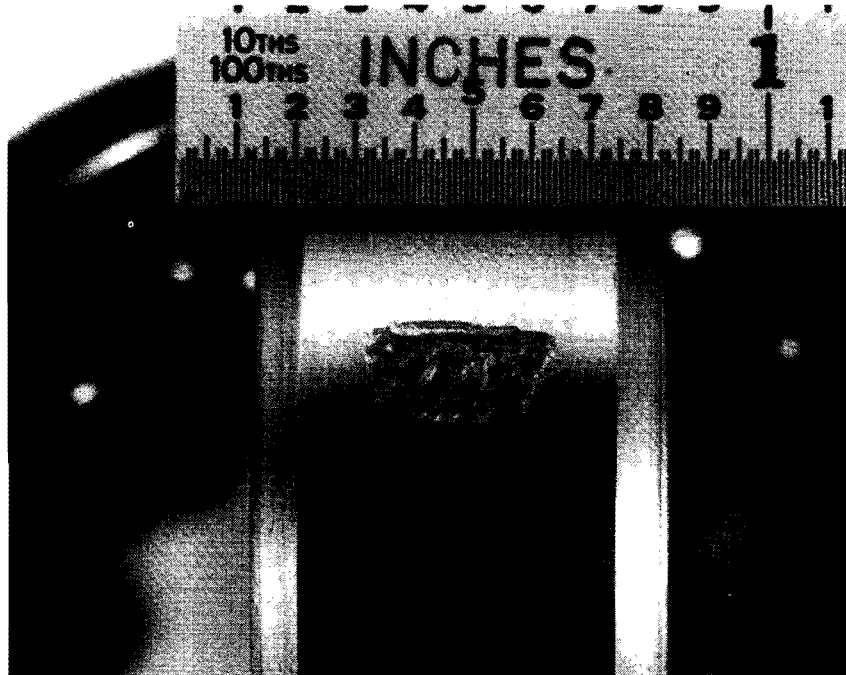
42-Degree Gearbox -310 Bearing Inner Race C/D,
